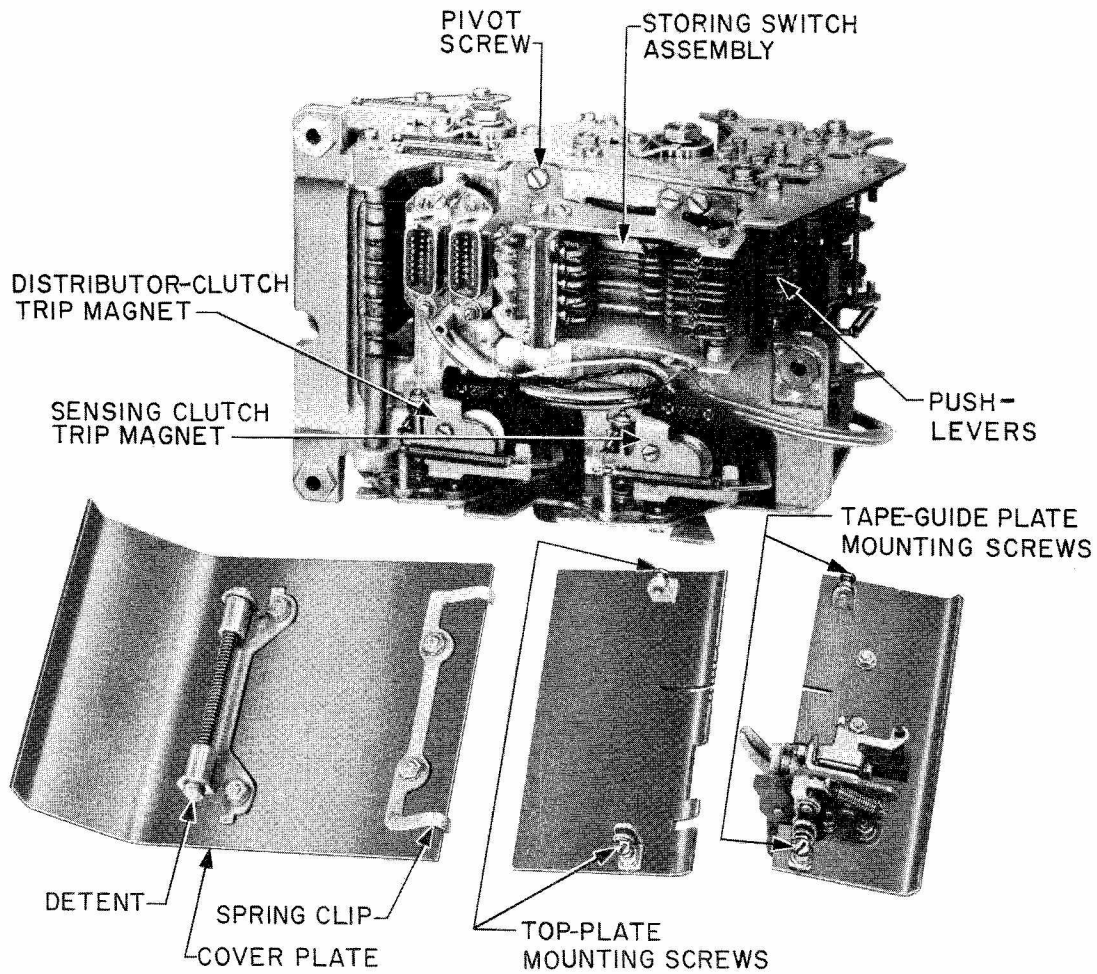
Sensing and Transmitting Mechanism - Bottom View
